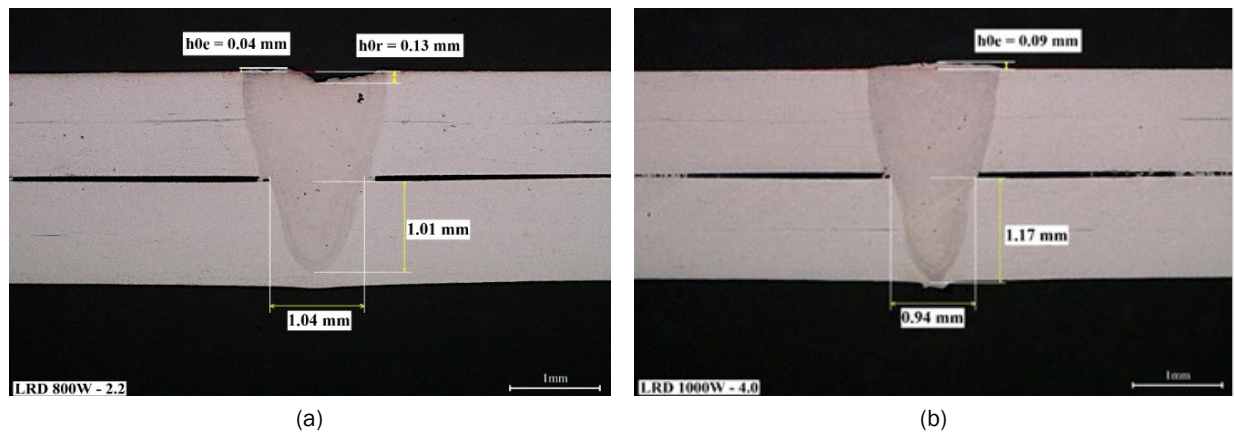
Laser weld cross-sections at: (a) 800 W at 2.2 m/min; and (b) 1000 W at 4.0 m/min. Source: AET.
